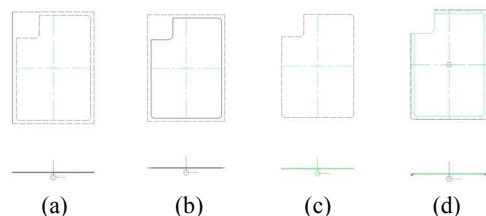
Modified layout design of SSD case: (a) shearing; (b) notching; (c) idle; (d) bending
